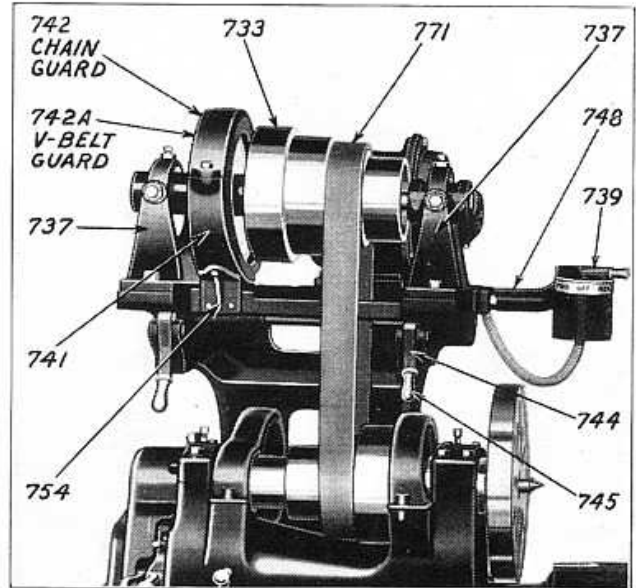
Front View of Silent Chain Motor Drive Unit Showing Location of Parts and Numbers.
